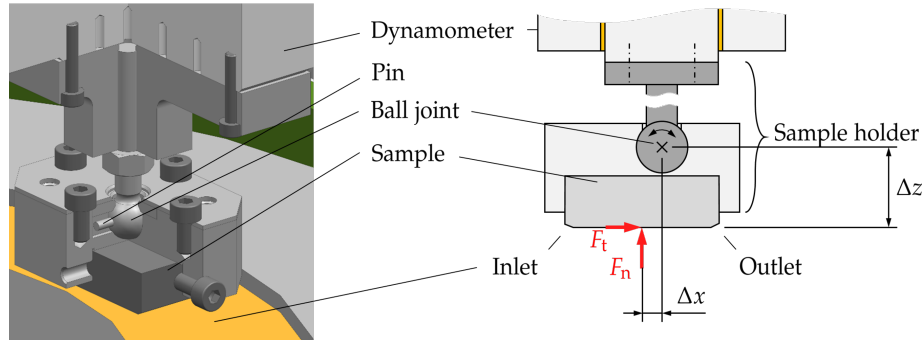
CAD model of the modified ball joint in section (left) and sample and sample holder in cross-section (right)
